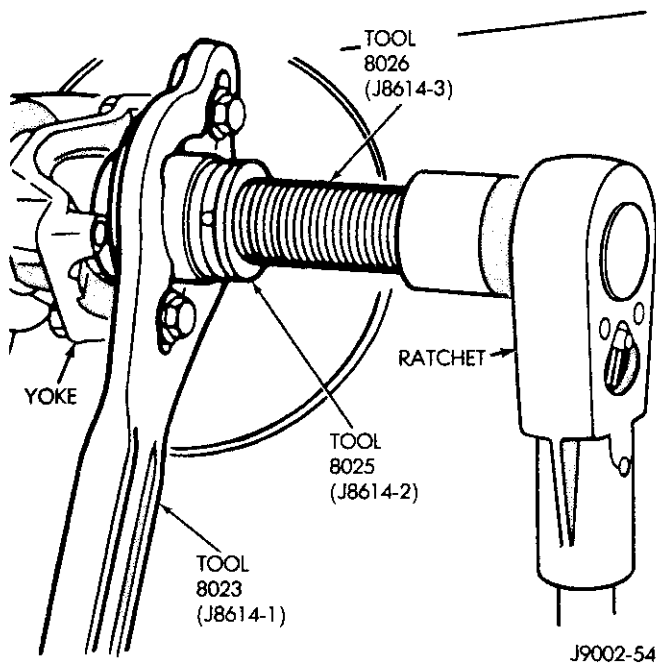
Drive Pinion Shaft (Axle) Yoke Removal
